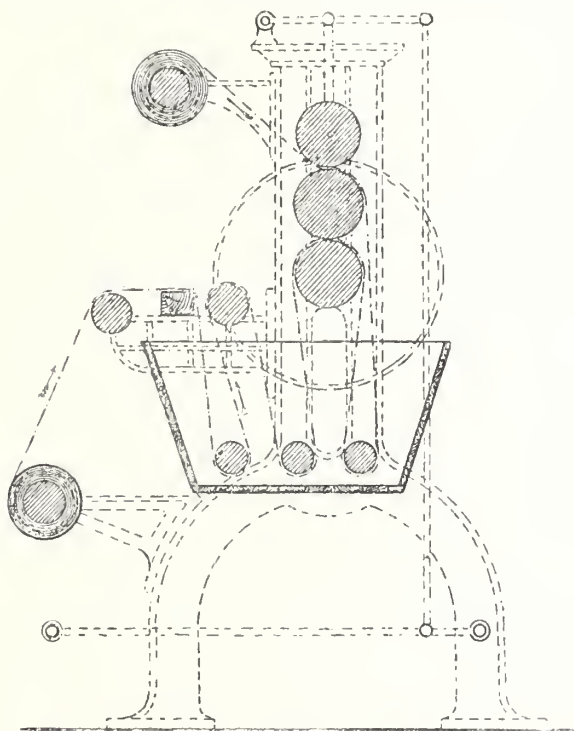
THREE-ROLLER PADDING MACHINE.
